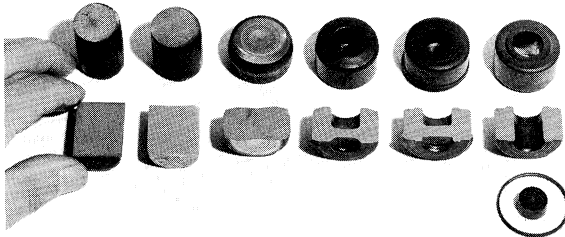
Sequence for producing cold/warm formed 5140H planet pinions showing parts in half section. Courtesy Hydramatic Div., GMC.
